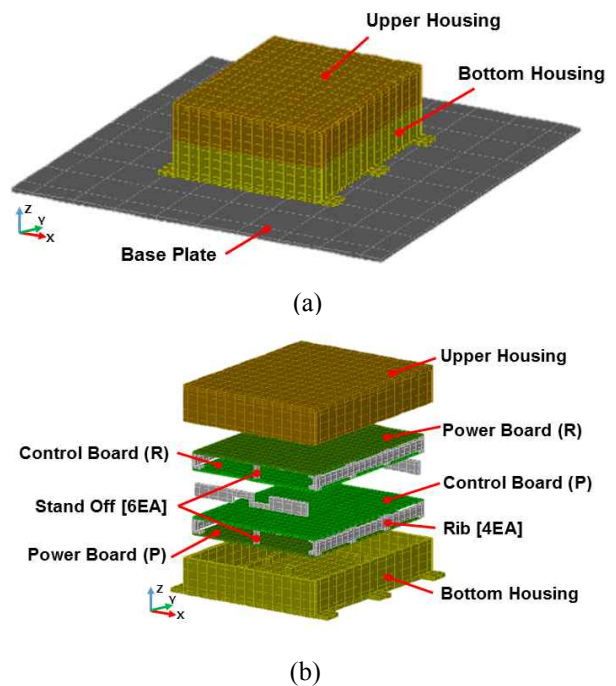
TMM Configuration of APD [(a) Isometric View, (b) Exploded View]
